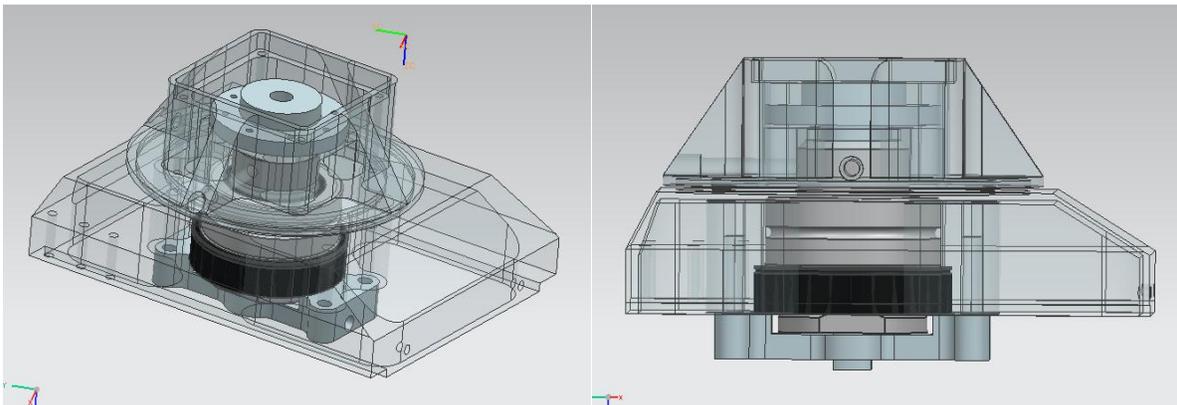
Isometric and side Views of Yaw Joint CAD Model. Here the translucent parts represent the two main custom components. The gray and black components represent purchase parts.
